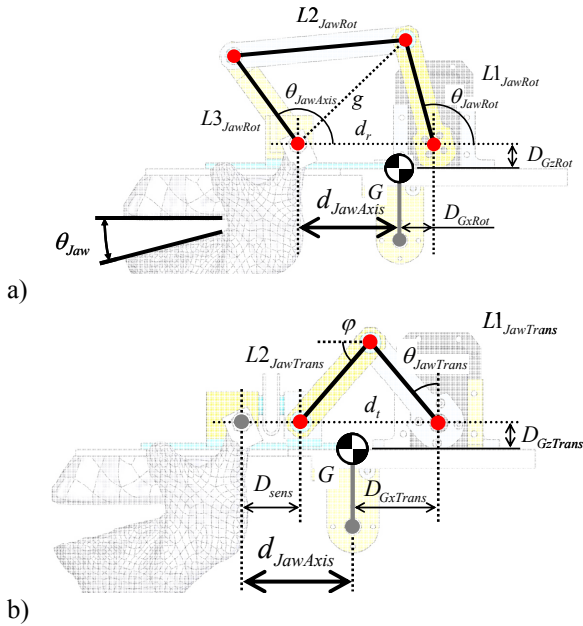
Kinematic model of the mandible of WKA-3: a) Kinematic model of four link drive mechanism; b) Kinematic model of crank link drive mechanism
